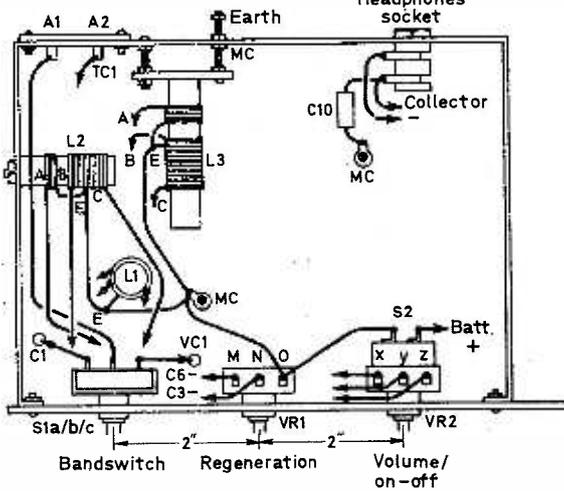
Bottom view of chassis and wiring of coils and controls.
